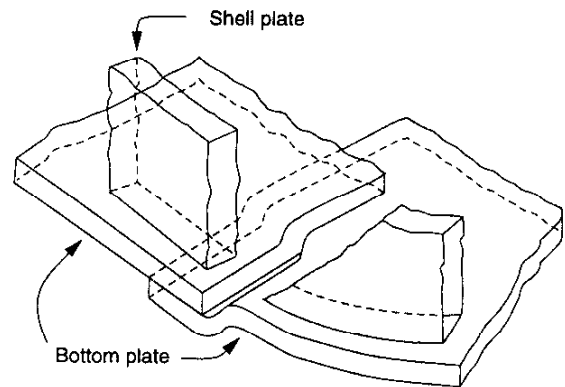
B—Method for Preparing Lap-Welded Bottom Plates Under Tank Shell (See 3.1.5.4)
